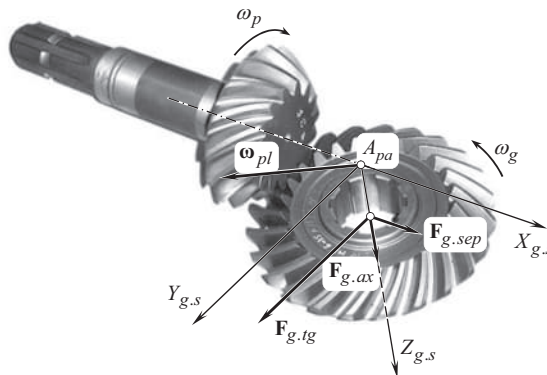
Forces that act on the gear in geometrically accurate intersected-axes gear pair.
